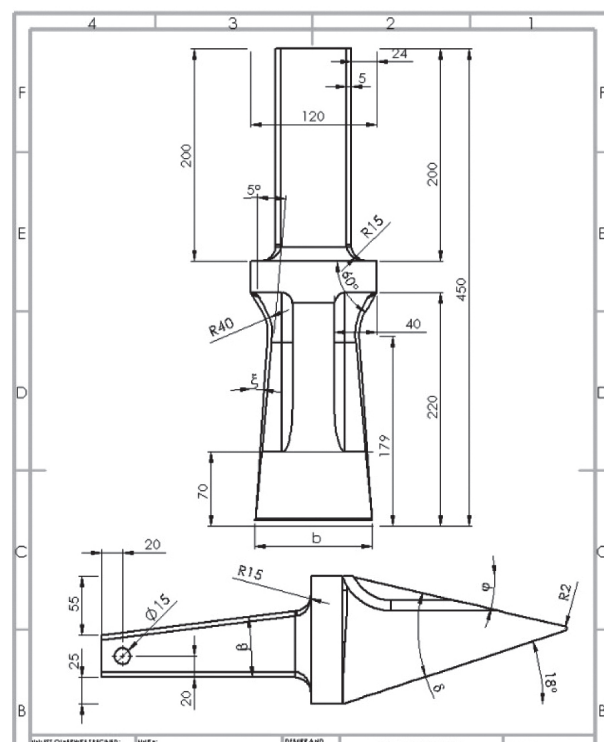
Geometric dimensions of chisel-shaped cutting tooth with support bracket used in open-pit coal mines in Oltenia Basin
